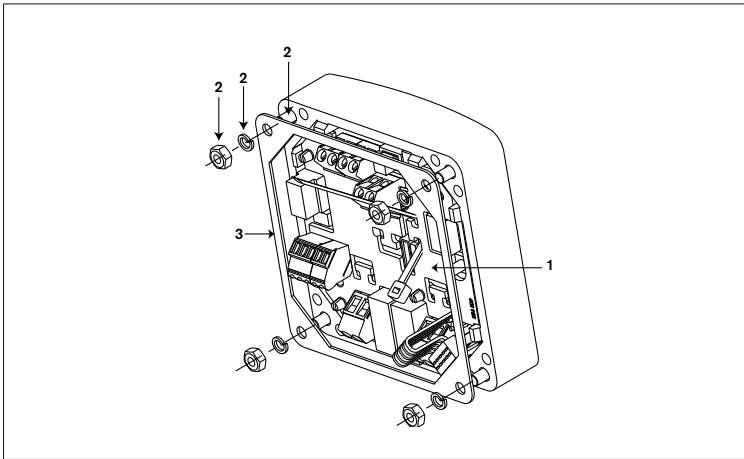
Spare parts explosion drawing 8205 panel-mounted version
